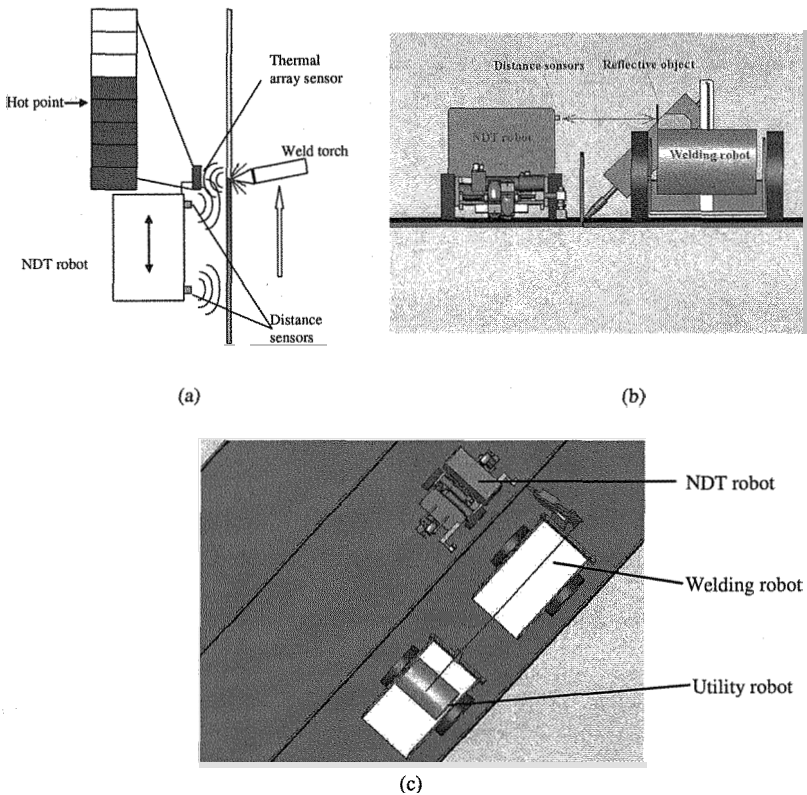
The NDT robot follows the welding robot for hot weld inspection
